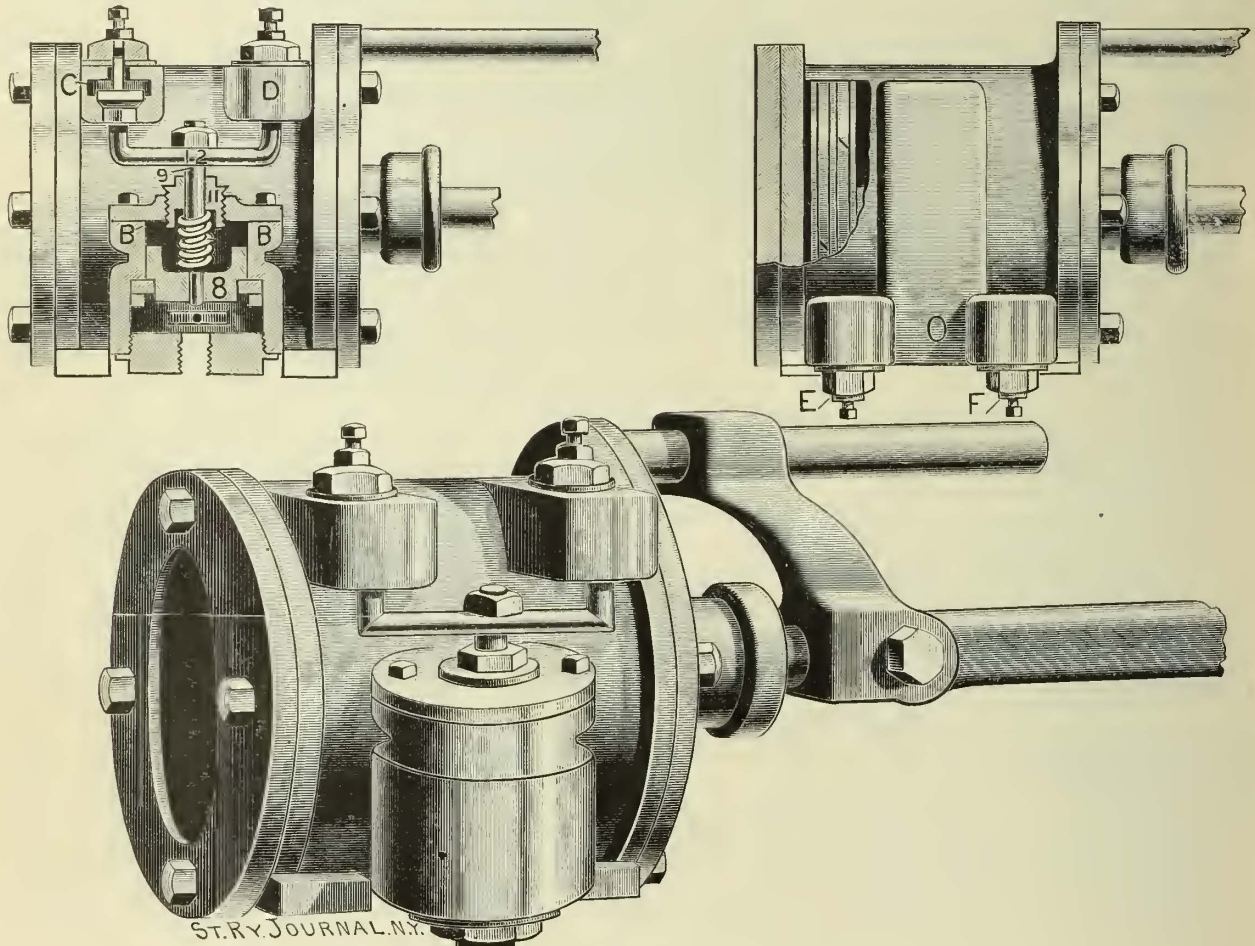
GENETT AIR BRAKE—DETAILS OF COMPRESSOR.
